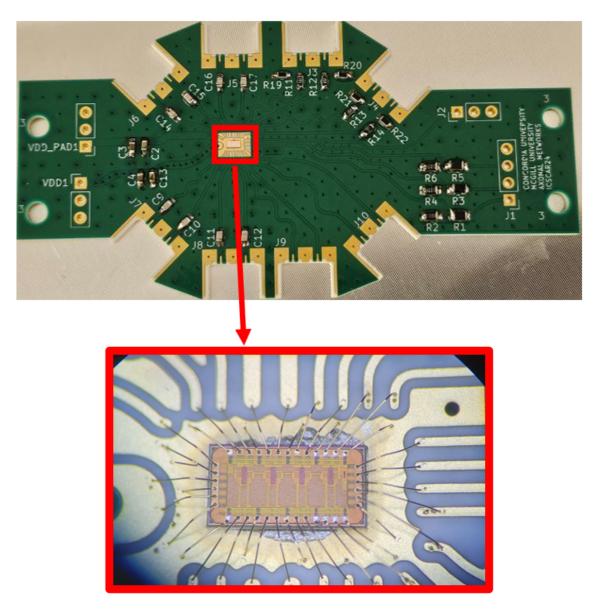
Fabricated chip of the proposed 4-channel linear optical receiver wire-bonded onto the designed high-speed PCB for electrical measurements.
